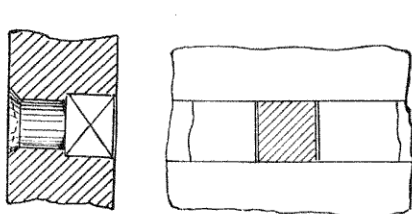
Piston ring stud of the Gasmotorenfabrik Deutz.
